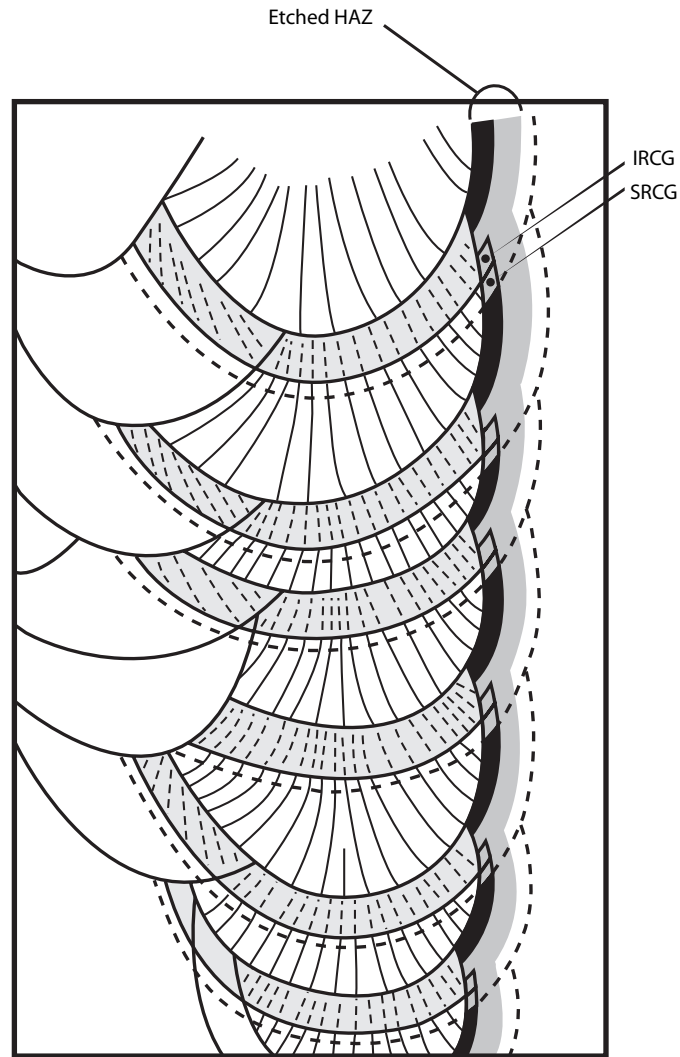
HAZ Regions in a Multi-pass Weld with One Plate Edge, Unbeveled
